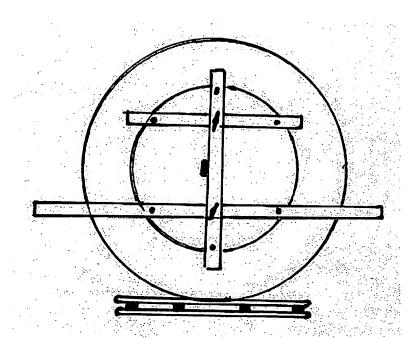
CHECKING ANGLE OF FRAME RAIL
